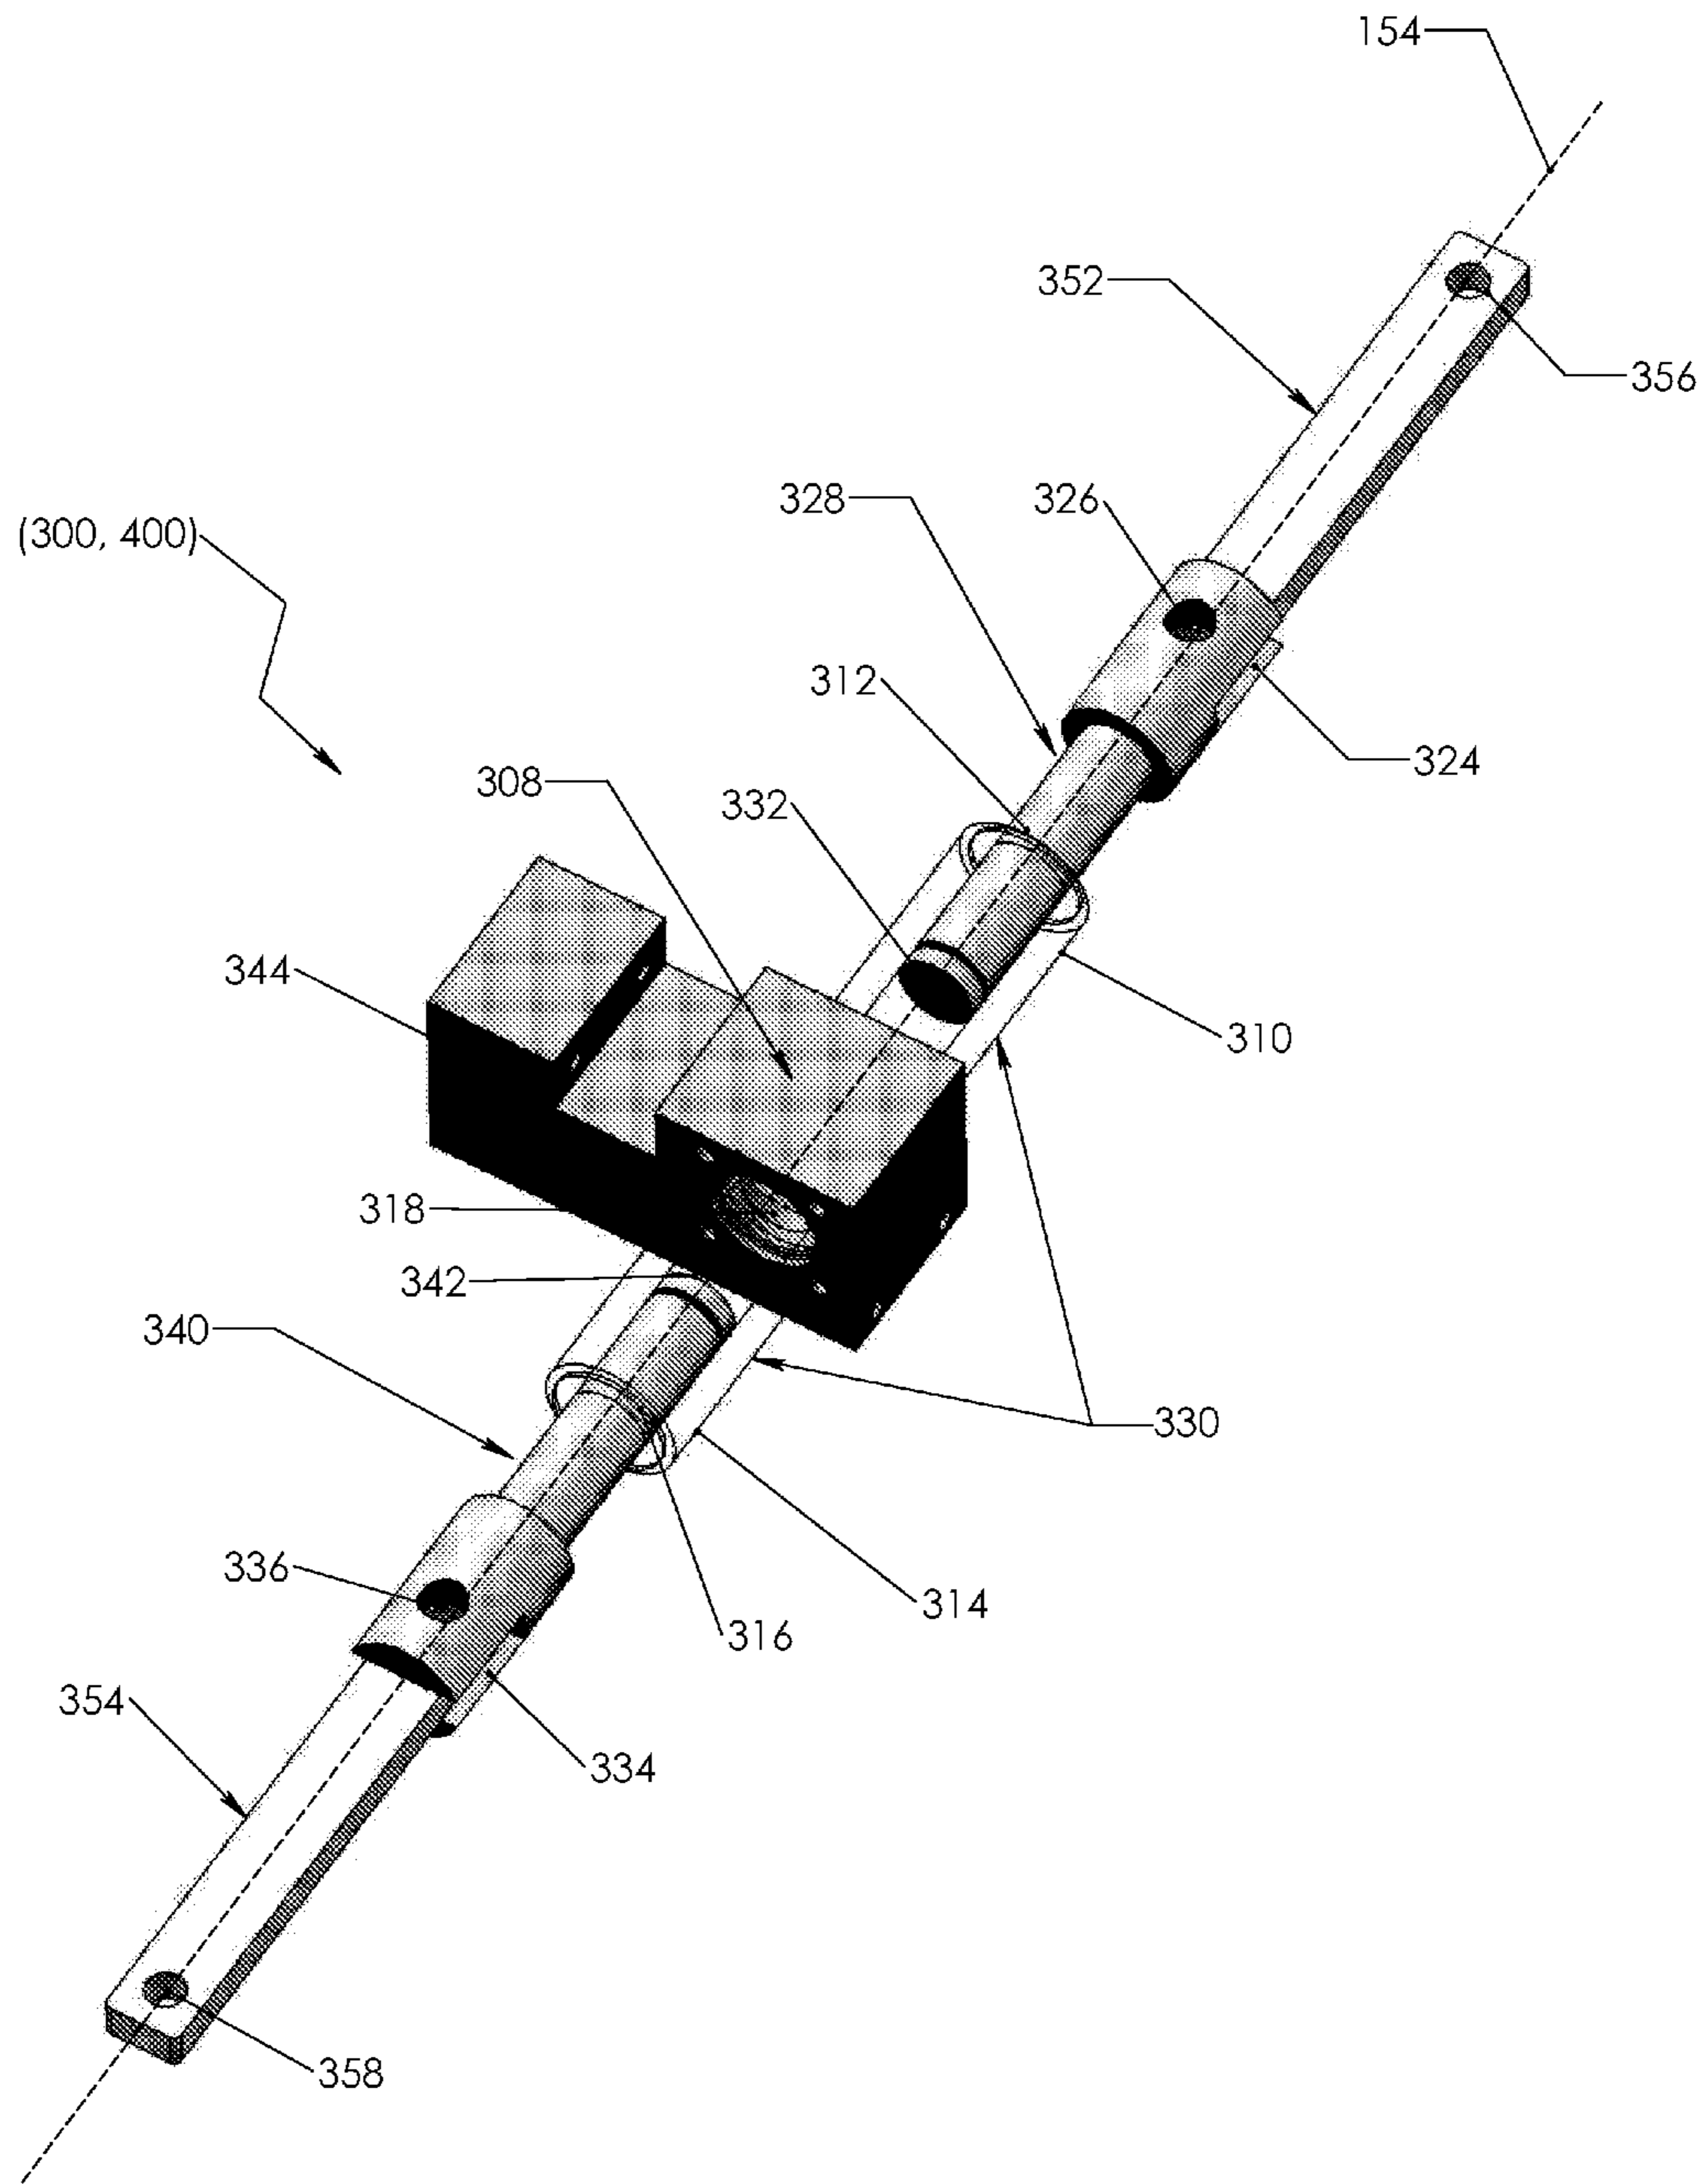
HYDRAULIC PISTON ASSEMBLY
